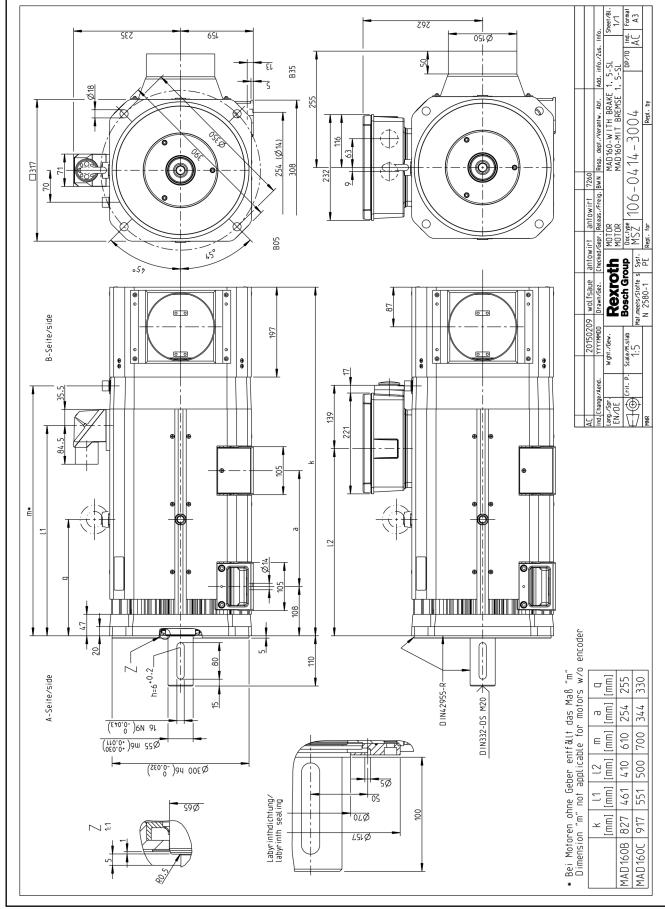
MAD160 with SL cooling, brake 1/5
